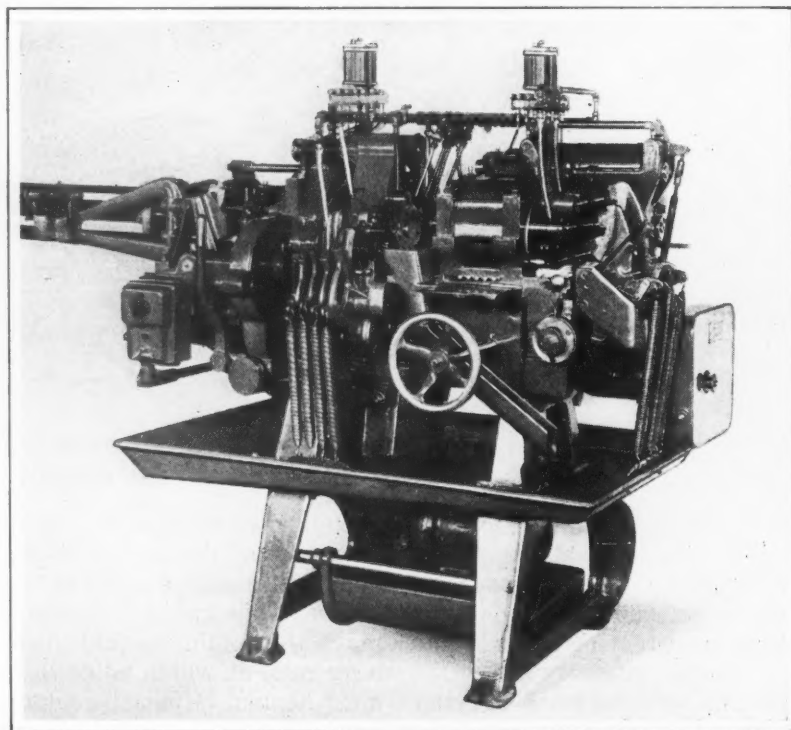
Davenport Five-spindle Automatic Screw Machine which has Recently been Completely Redesigned
